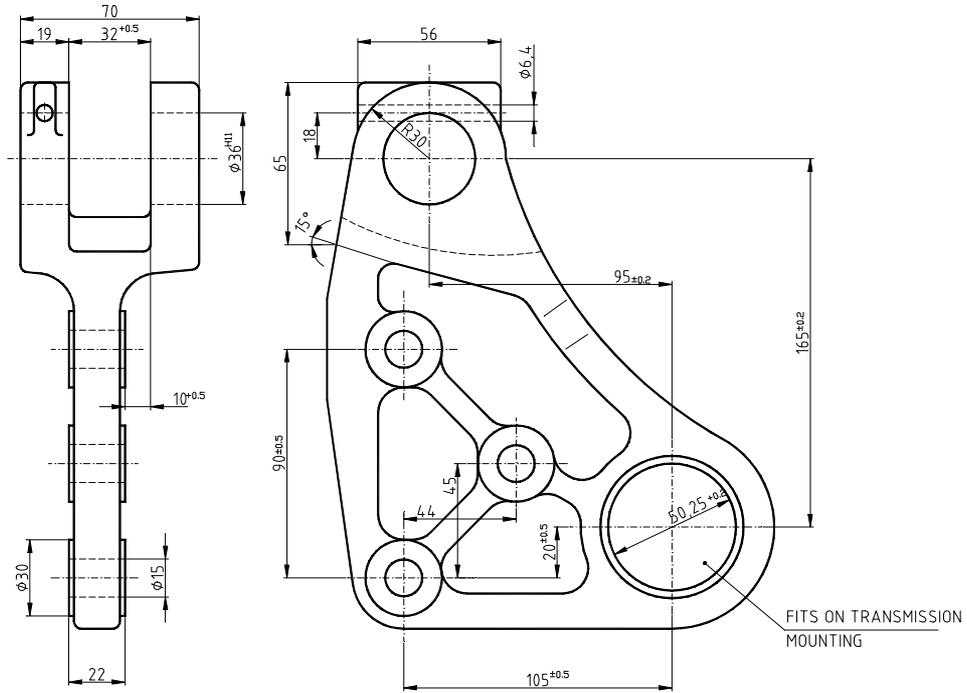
Center mounting support parts number: A 425 551 13 21
